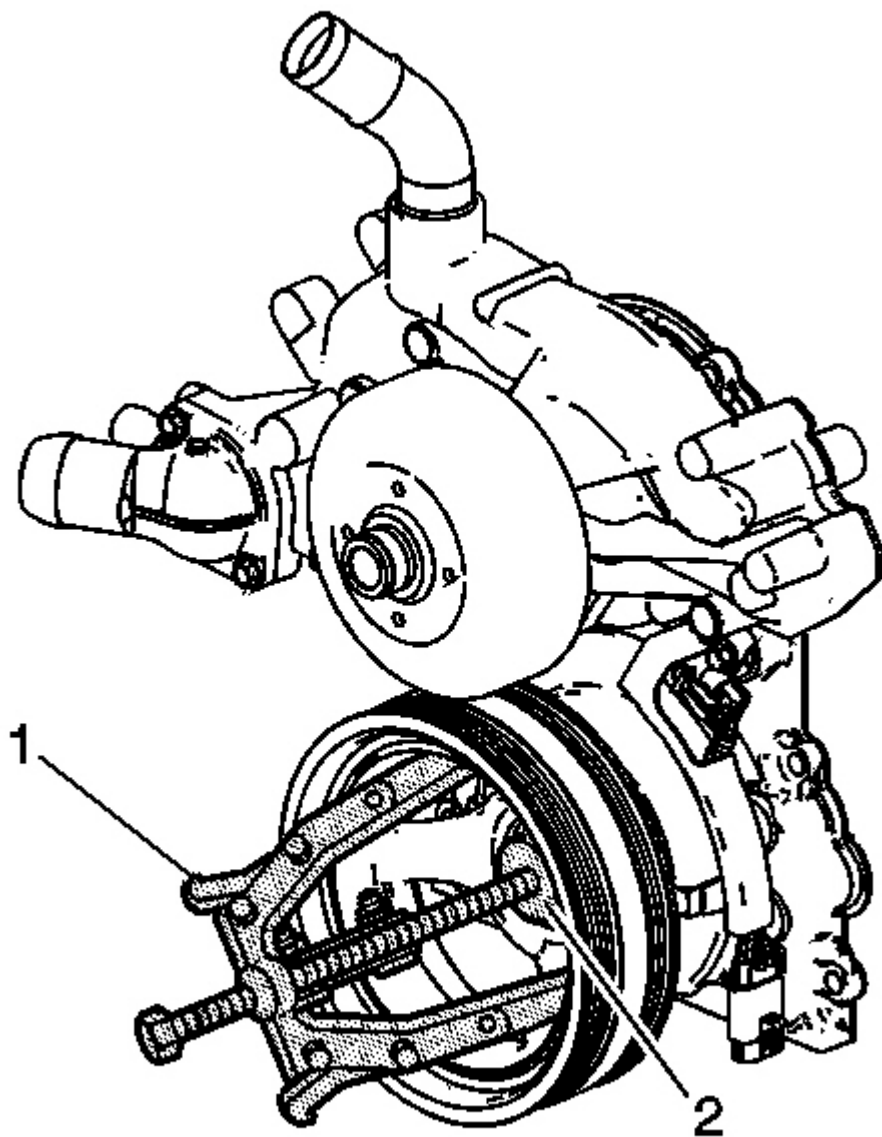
View Of Crankshaft Balancer With J 41816 & J 41816-2 Removal Tools
